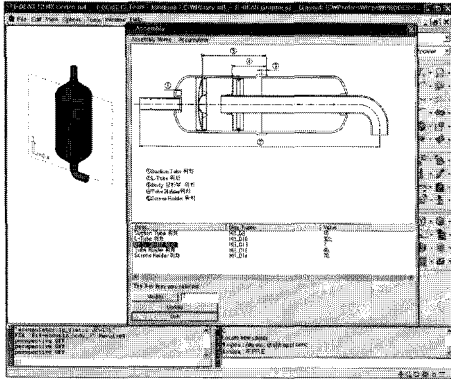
CAD screen and GUI for designing an assembly of the accumulator module.
